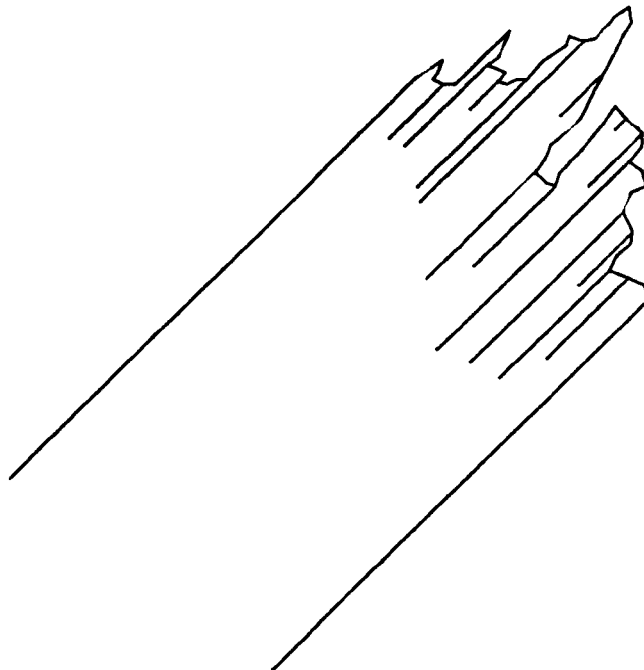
Schematic Representation of ±45° Fibre Tow Failure Showing Jagged Fracture Surface with Associated Matrix Splitting.
